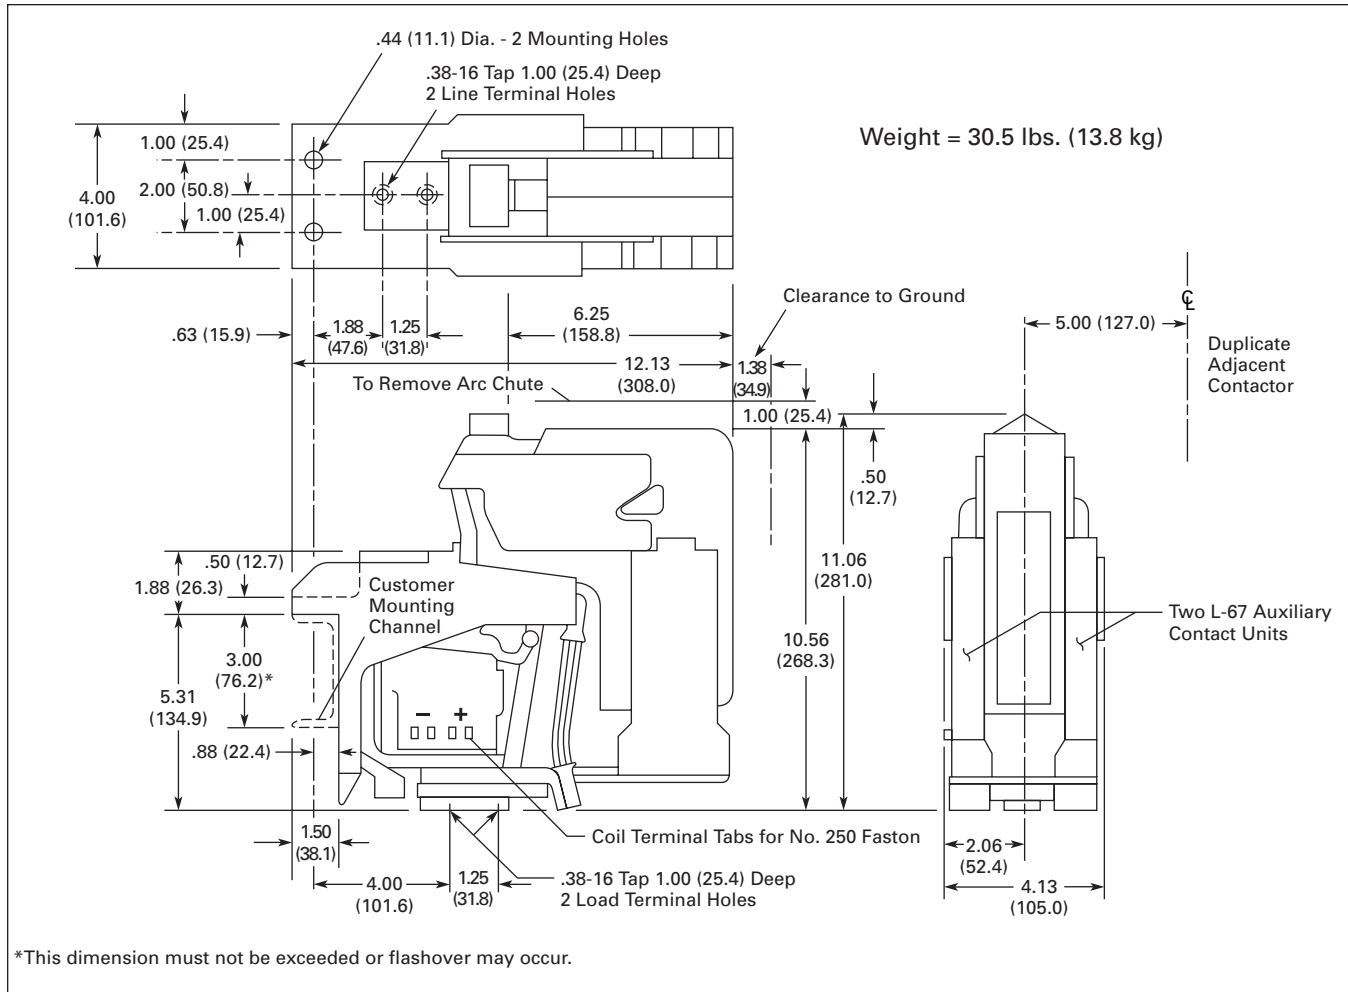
Dimension Drawing — Approximate Dimensions in Inches (mm)
